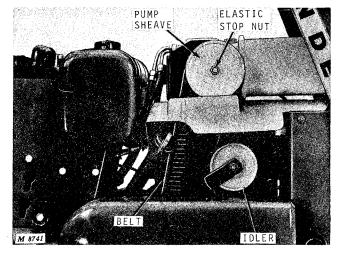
Installing Drive Components-90-Degree Unit 112 Tractor with Kohler Engine
